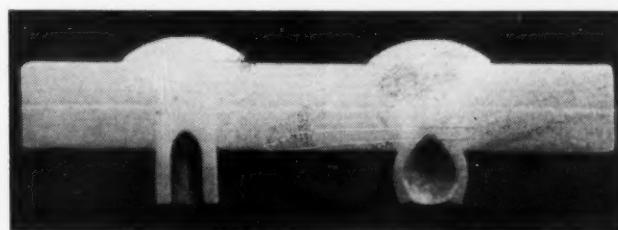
RIVET BEFORE AND AFTER EXPANSION
